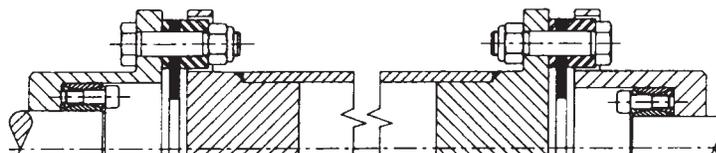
Double flexing coupling with extended spacer mounted with two internal Locking Assemblies.
